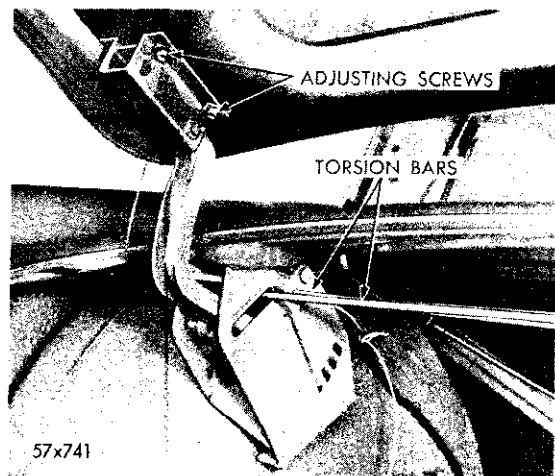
Rear Deck Hinge Assembly (Imperial)
